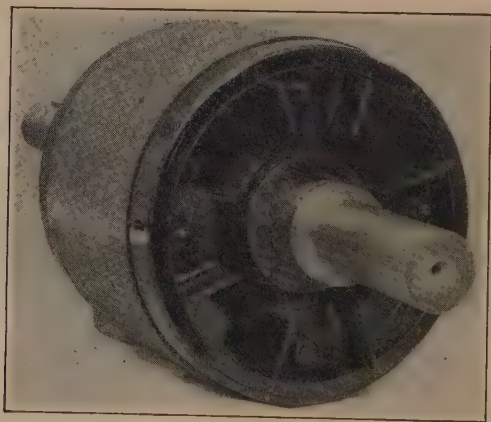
Squirrel-cage rotor with cast-in winding.
